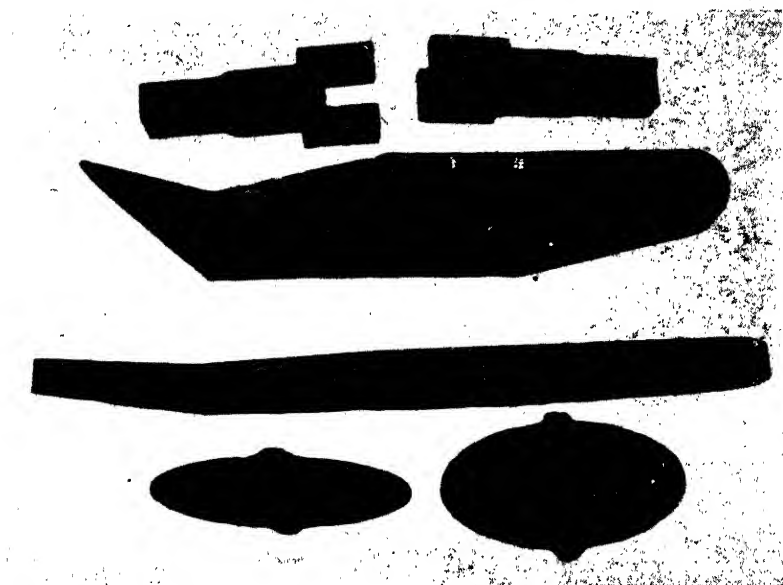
Plates from 20 gauge to 10-in. thick can be flame-cut mechanically.
